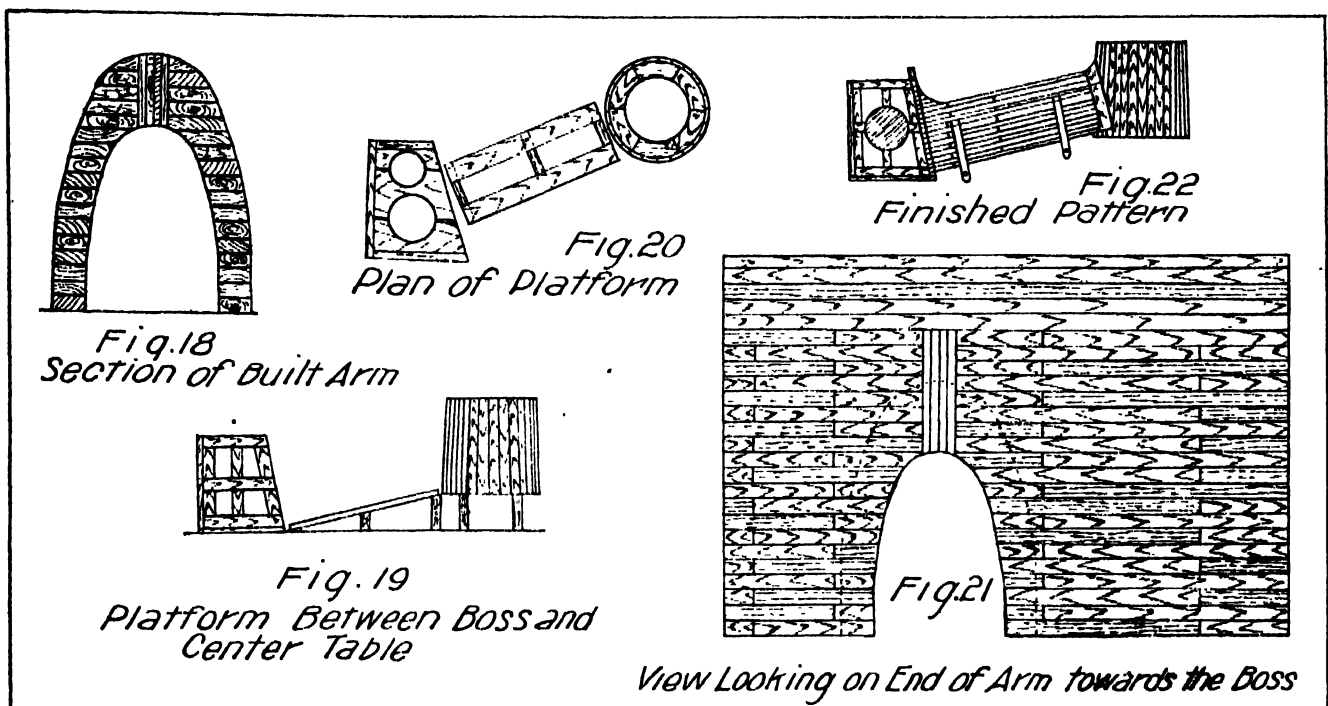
SECTION OF BUILT UP ARM FIG. 19 PLATFORM BETWEEN BOSS AND CENTER TABLE FIG. 20—PLAN OF ERECTING PLATFORM FIG. 21—VIEW OF THE END OF THE ARM TOWARD THE BOSS FIG. 22—FINISHED DOUBLE ARM BRACKET PATTERN
